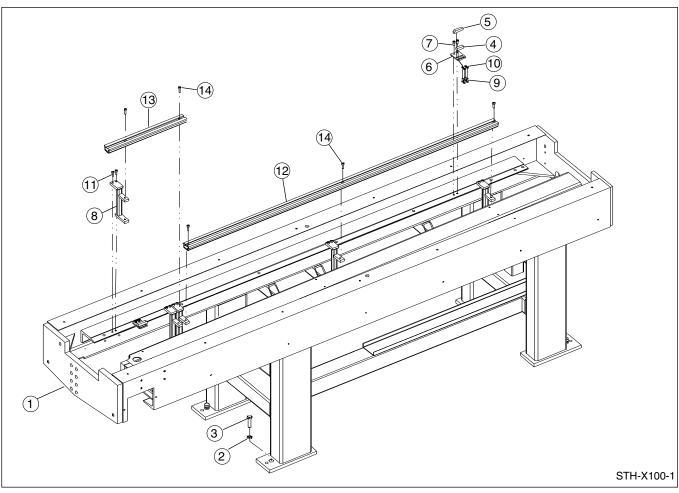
FIGURE A - TUBE HONE MACHINE BASE ASSEMBLY (1 of 8)
